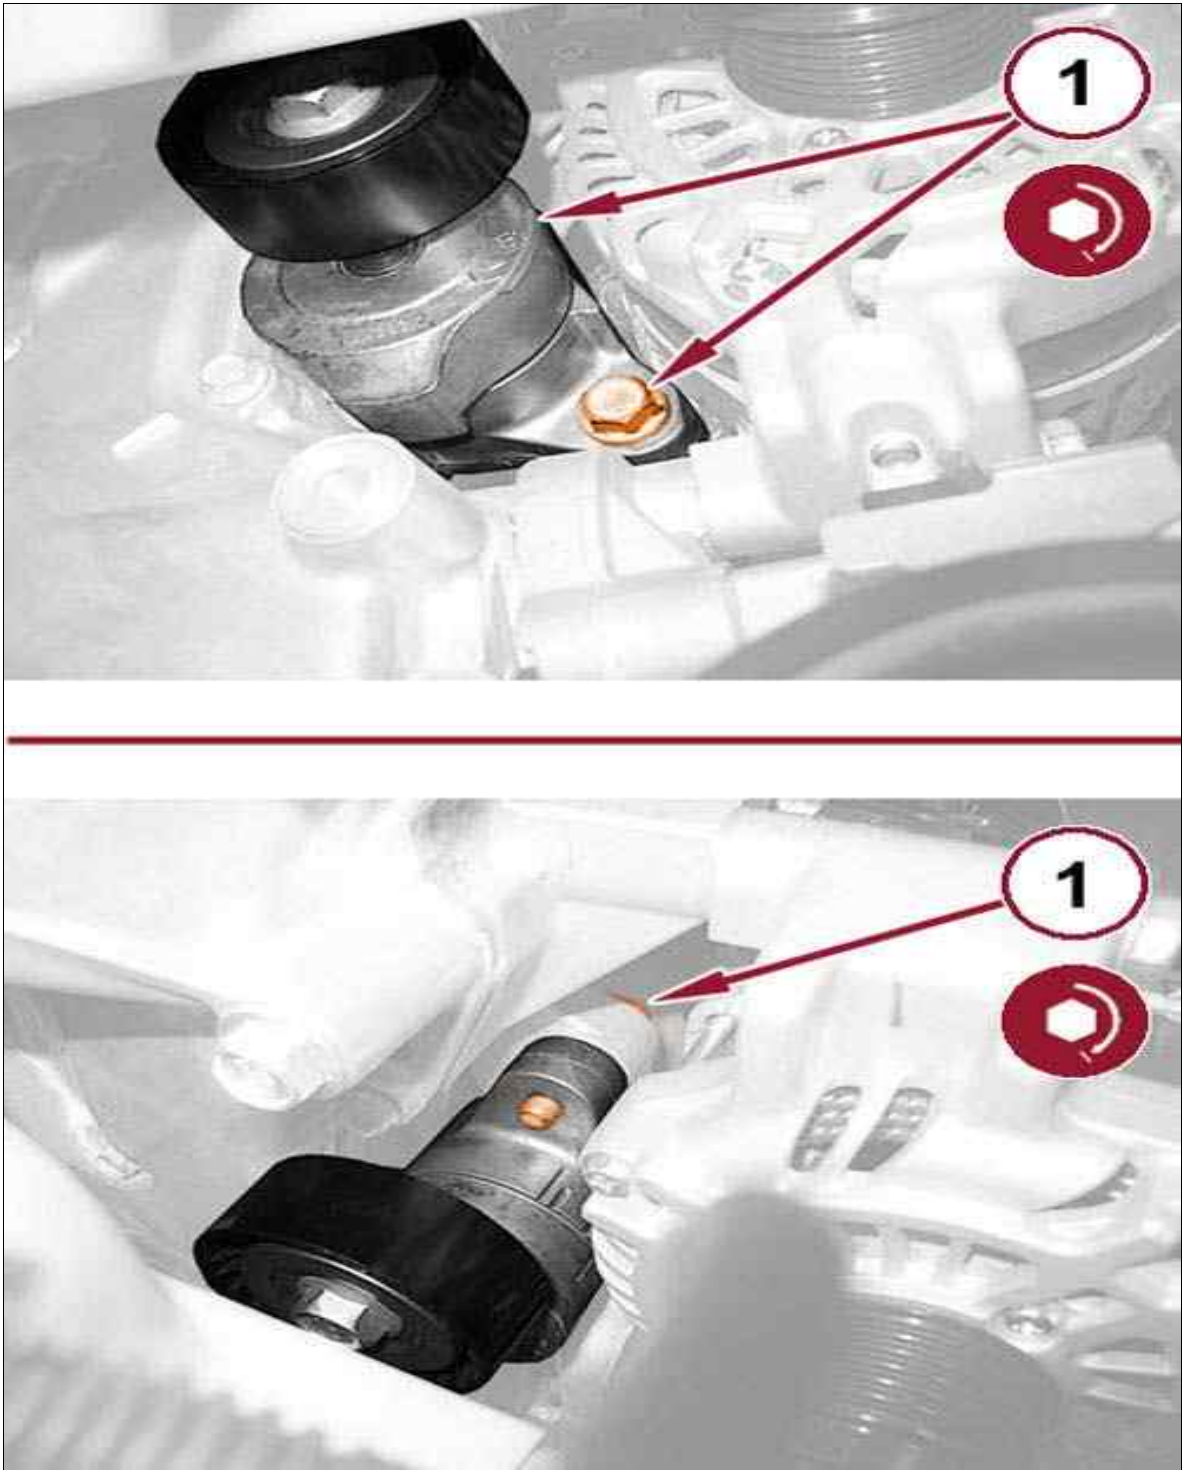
Generator Mounting Bracket, Accessory Belt Tensioner & Bolts
